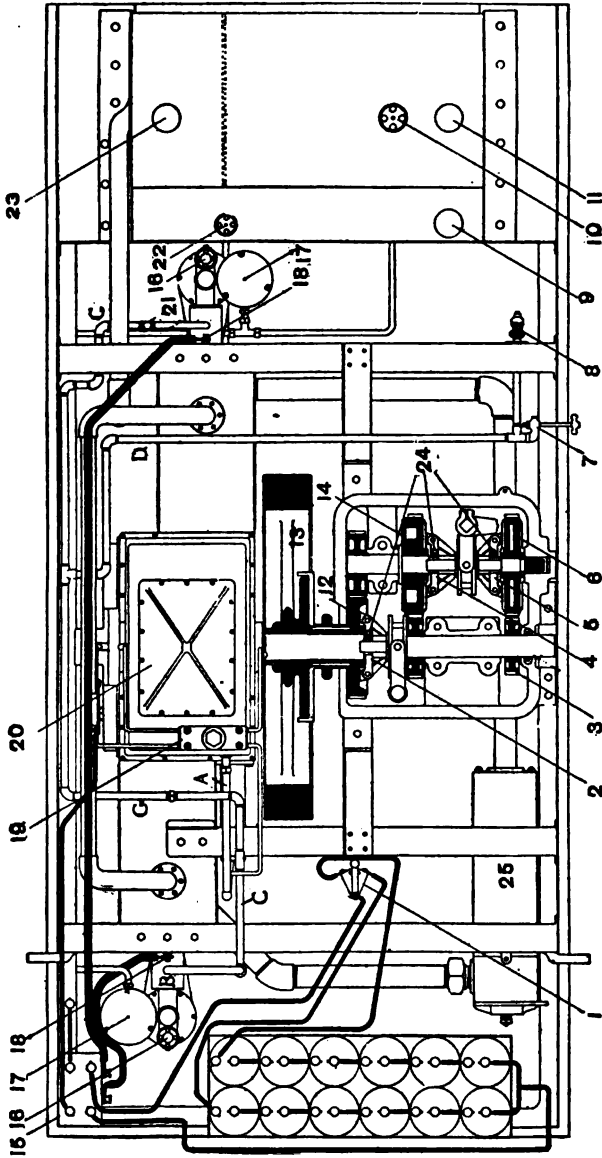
Plan View of Engine and Working Parts of the Winton Two-cylinder Car. Switch under driver's seat (1); spur gears in transmission case (2, 3, 4, 5, 6); air-line set governor valve for regulating air pressure in motor (7); foot button for controlling air-line system and throttling motor (8); oil tank cap (9); gasoline tank cap (11); gasoline valve (10); friction gear clutch (12); fly-wheel (13); slow-speed friction gear (14); spark coil (15); gasoline valve on carburettor (16); float pin (17); spark plug (18); oil box into which oil is pumped for distribution to working parts (19); cover of engine case (20); poppet valve on air line to relieve back pressure on air pump (21); valve for filling main oil tank (22); cup for filling water tank (23); adjusting nuts on speed gears (24); muffler (25). The lettered parts are: A, the air pump; B, the inlet valve chamber; C, C, C, the pipes of the air line; D, the pipe leading to the air line control valves, 7 and 8.
